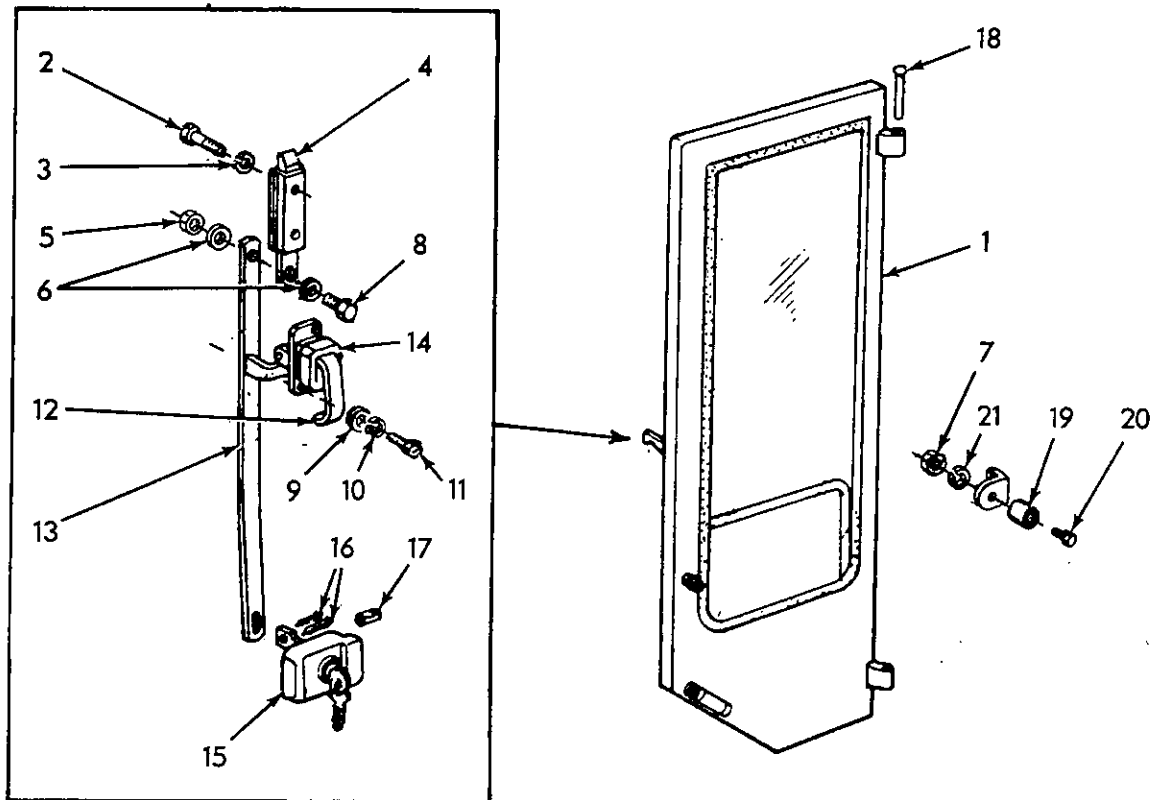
LEFT SIDE DOOR LATCH LINKAGE
